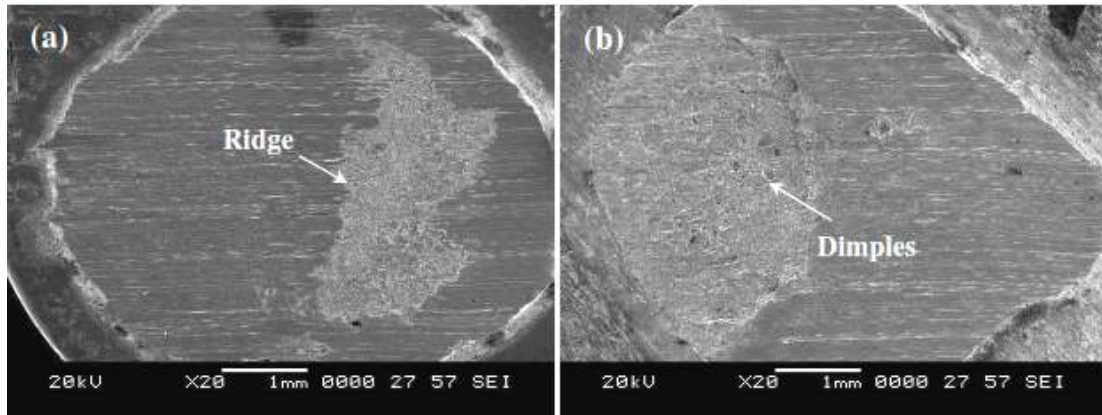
SEM micrographs of the fractured surfaces of Sn-2.5Ag-0.5Cu solder (a) smooth Fe-Ni (b) rough Fe-Ni substrate surfaces
